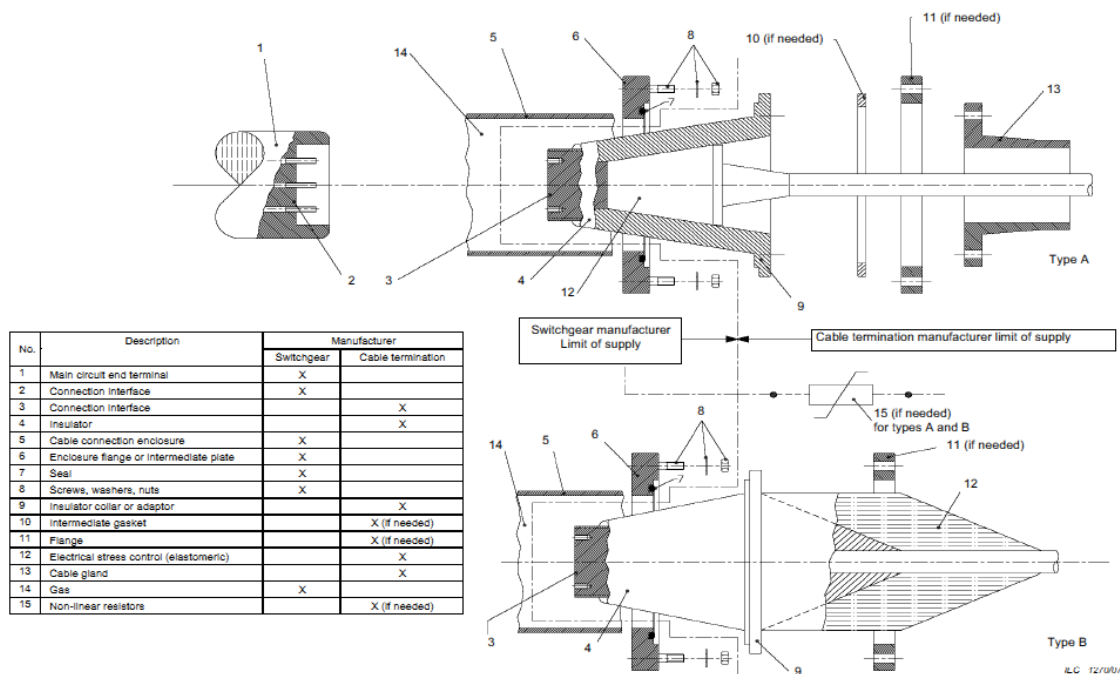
Dry-type cable connection assembly – Typical arrangement
